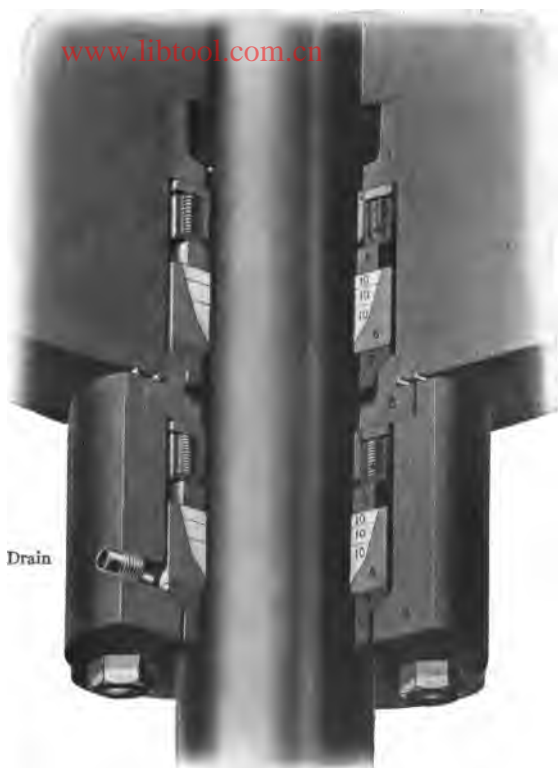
United States Metallic Packing. Names of parts: 1, Preventer; 2, Spring Guard; 3, Spring Bushing; 4, Springs; 5, Follower; 6, Vibrating Cup; 7, Ball Ring; 8, Ball Seat; 9, Gland; 10, Babbitt Metal Rings.
